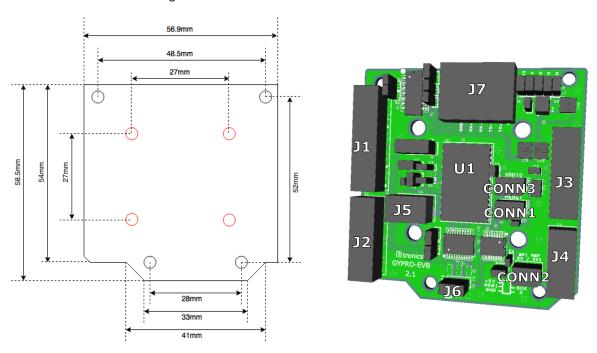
GYPRO®-EVB2 board (unpopulated) dimensions in millimeters with 3D top view
